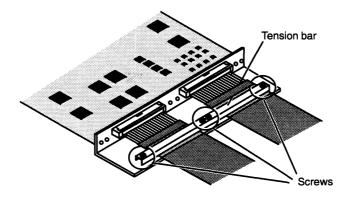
Attaching the Model 7411–K VAC/16 Cable Tension Bar
